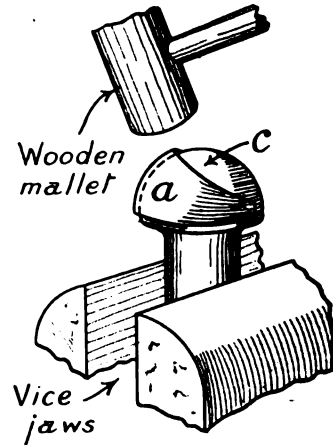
METHOD OF "DRAWING" OR STRETCHING THE COPPER.
